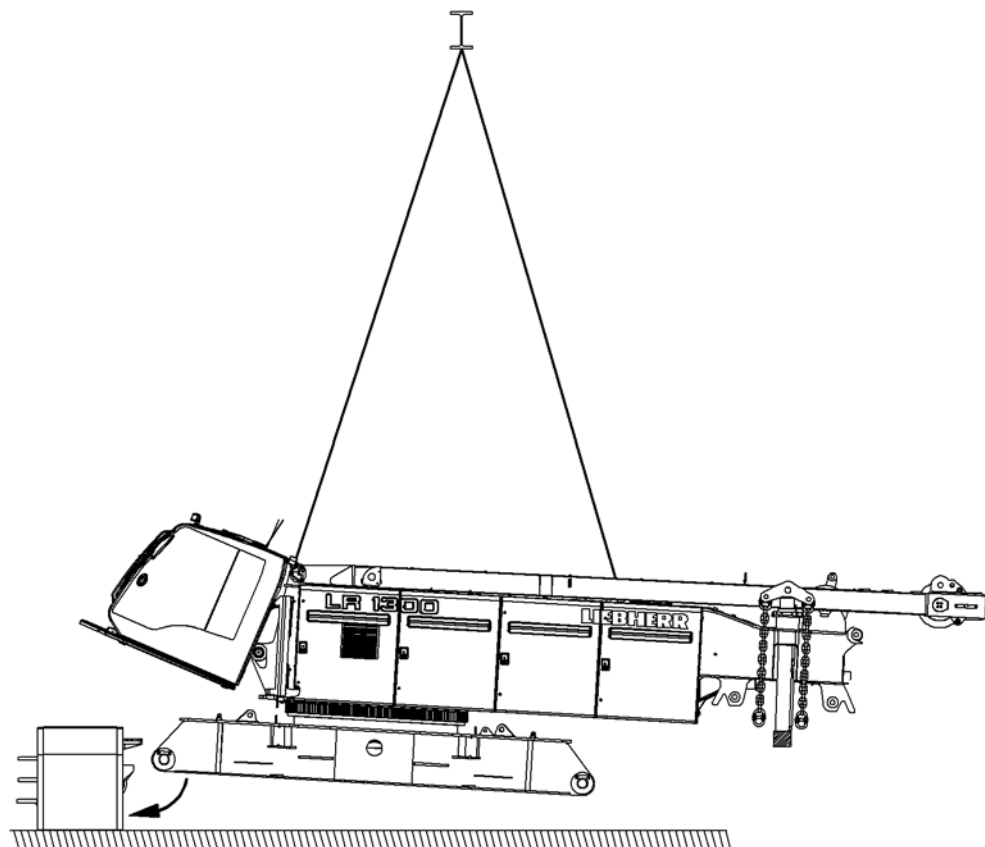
Unloading the machine and attaching the first crawler side frame without a self-assembly system
